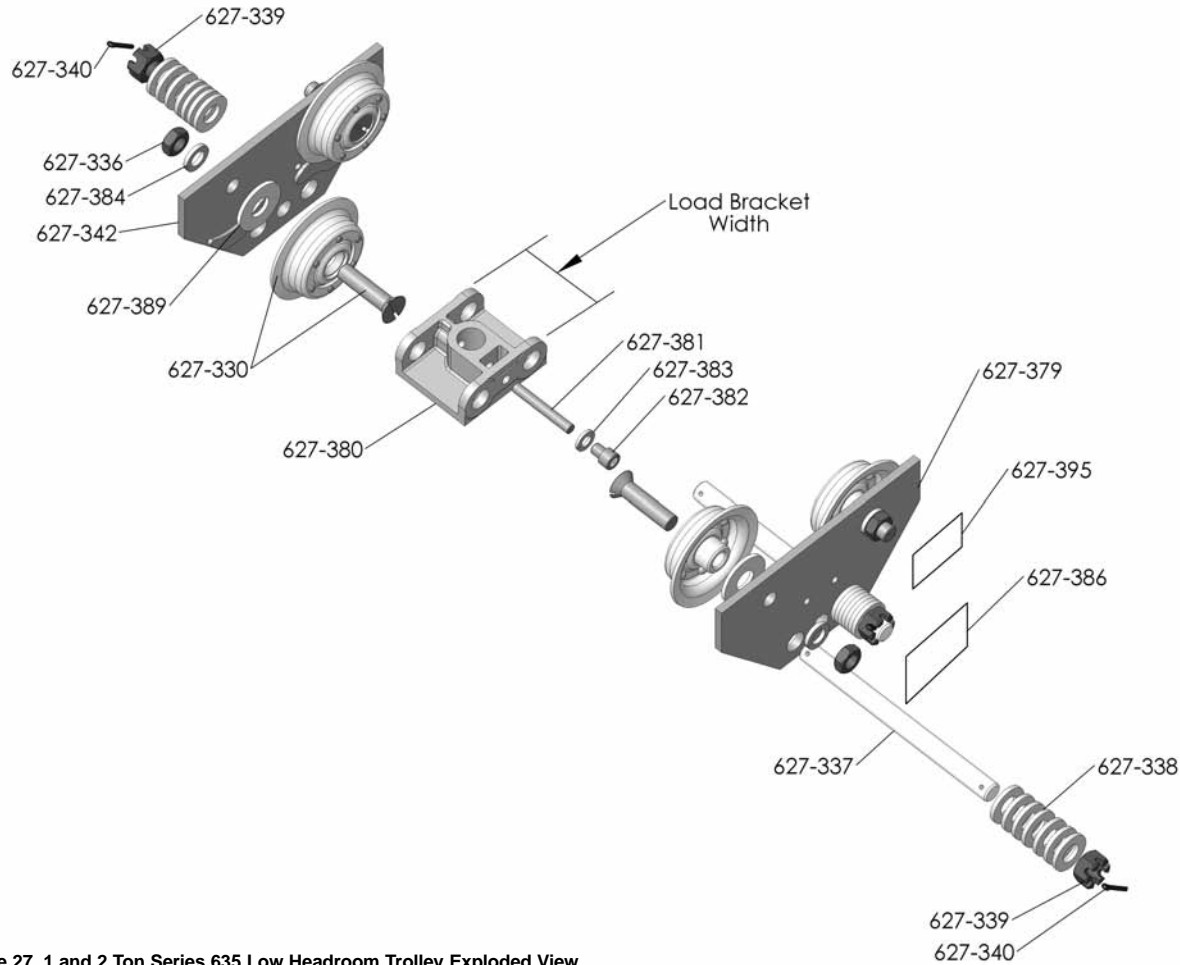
1 and 2 Ton Series 635 Low Headroom Trolley Exploded View
